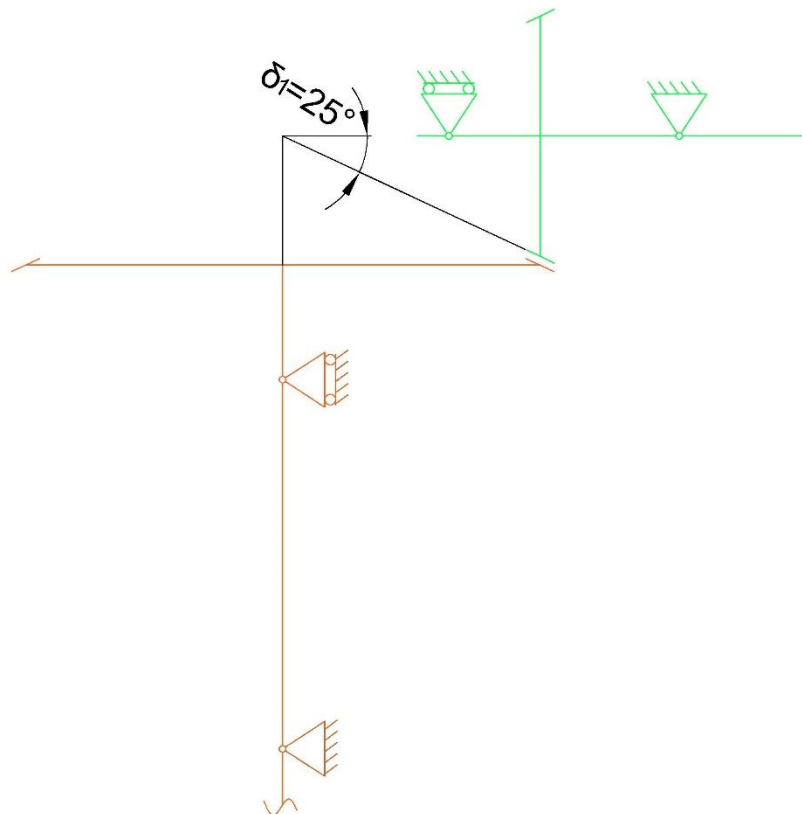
UH-1 tail-rotor gearbox simplified schematic
